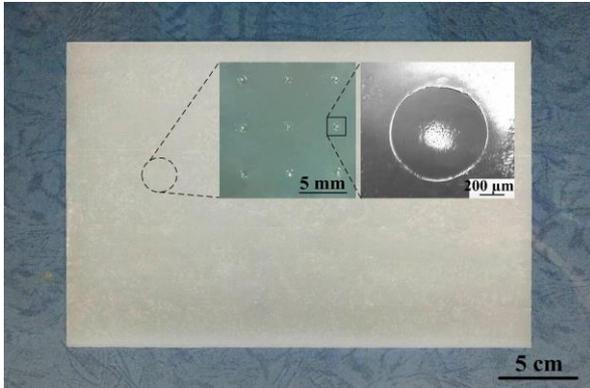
Hot-embossed parts fabricated by a large-area epoxy resin mold
